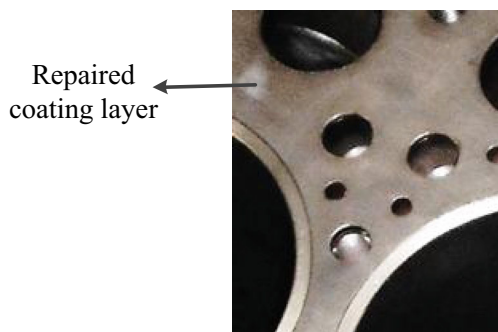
The remanufactured engine's cylinder with repaired coating layer
